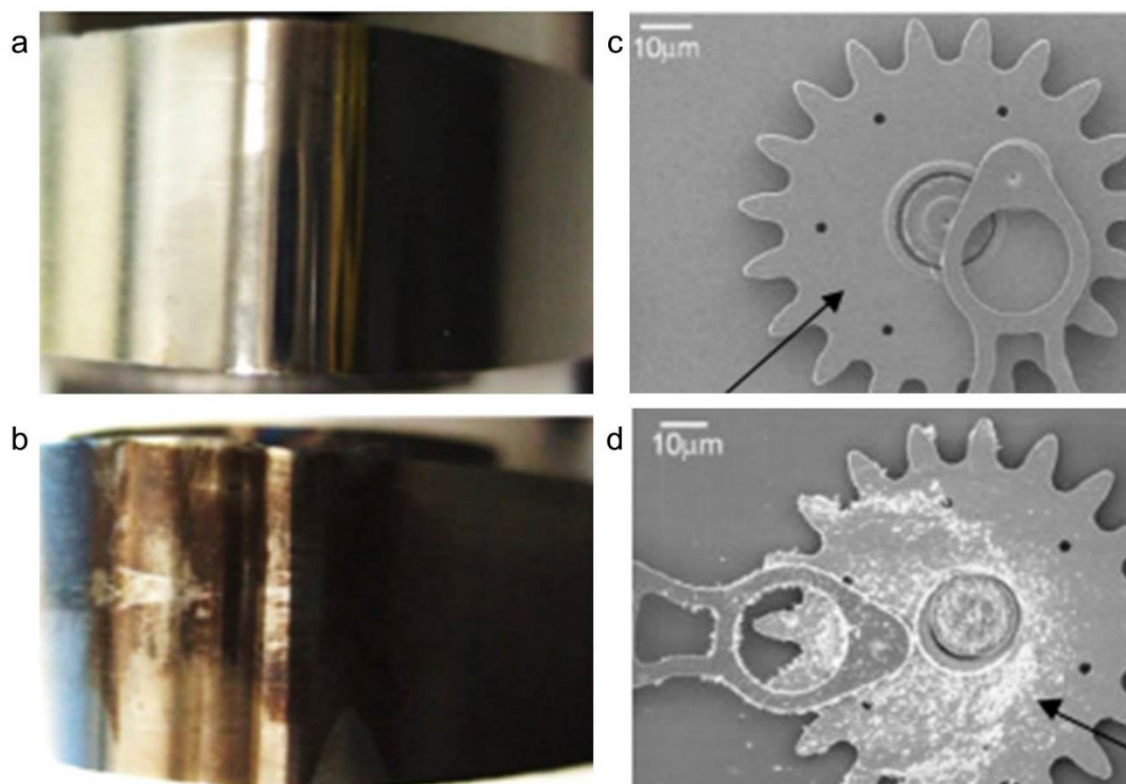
Wear tests using PAG oil formulations, forming (a) minimal wear and (b) varnish film formation [189]. At a different size scale, MEMS gears (c) before testing and (d) after failure caused by adhesion [190].
